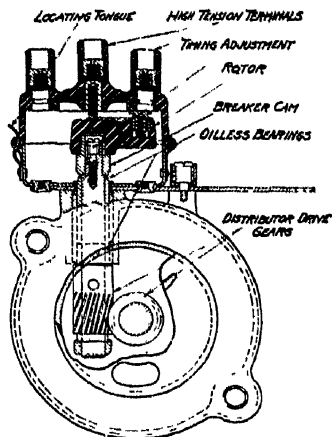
End view of Delco generator with battery ignition unit driven from armature shaft.
